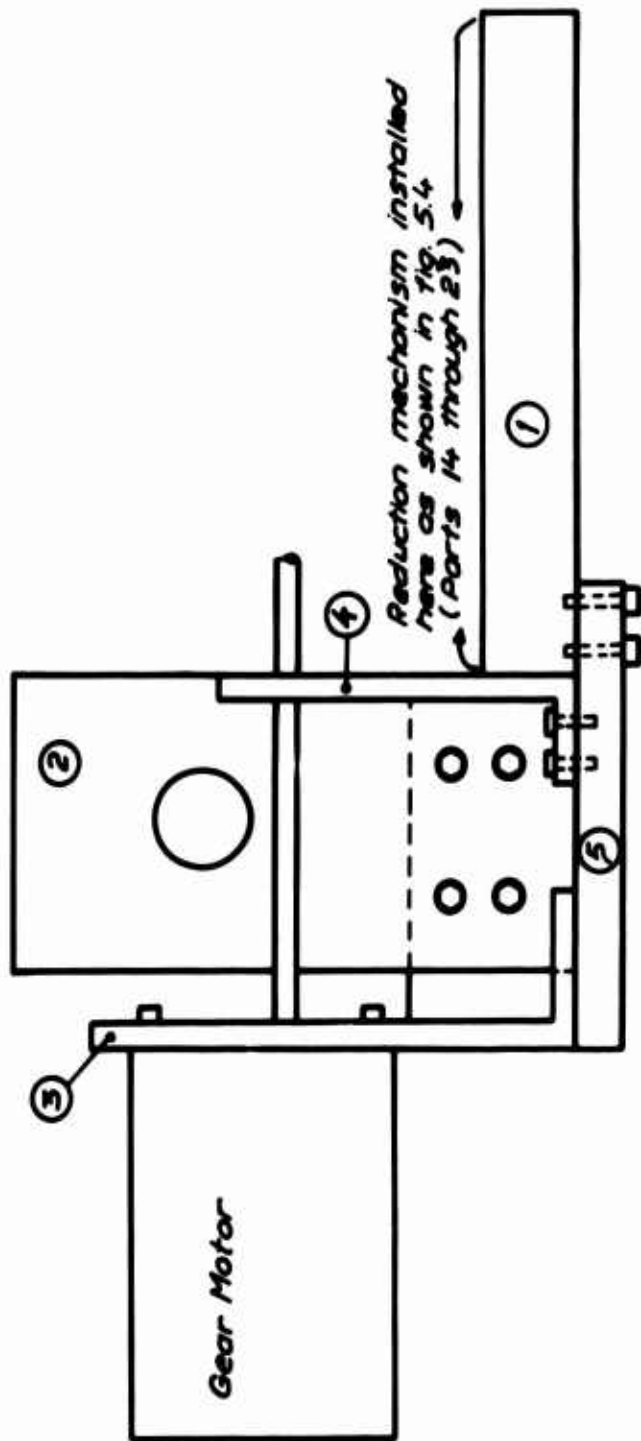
REAR VIEW OF DRIVE MECHANISM
